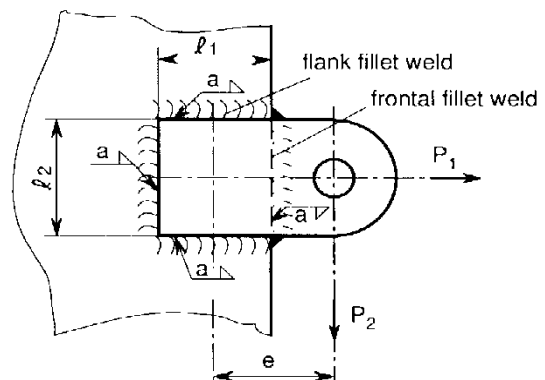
Fillet weld joint with normal and shear forces
